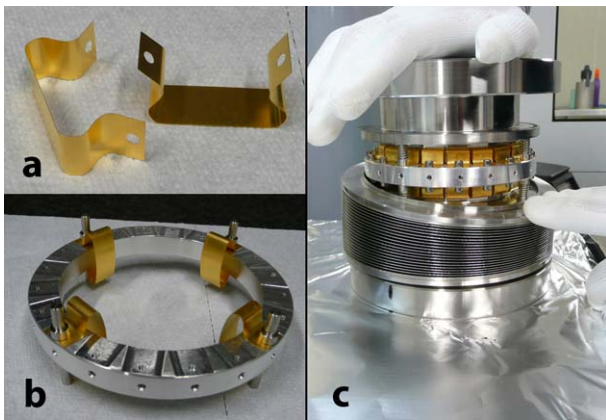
View of gold coated strip (a), supporting annular ring (b), RF shielded bellows assembly (c).
